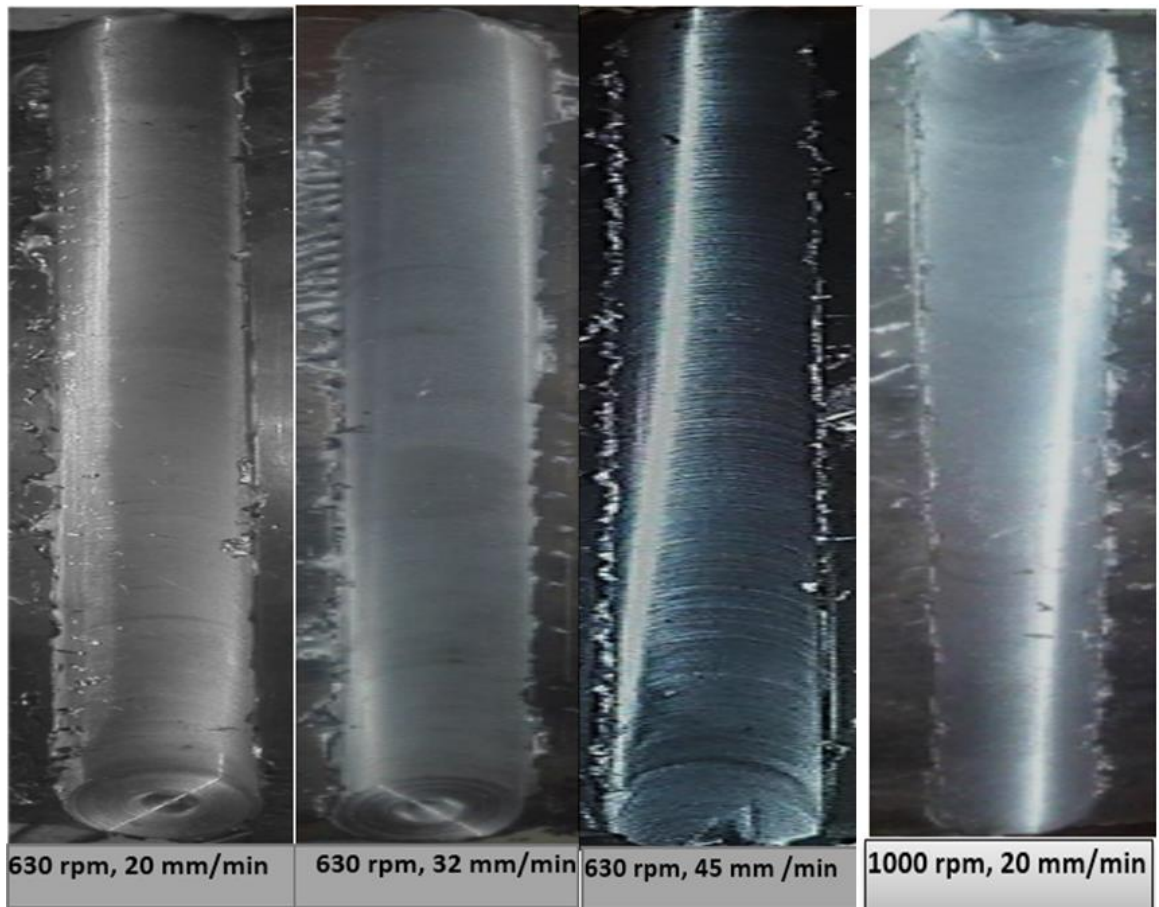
Welding plates at different welding and rotational speeds.
